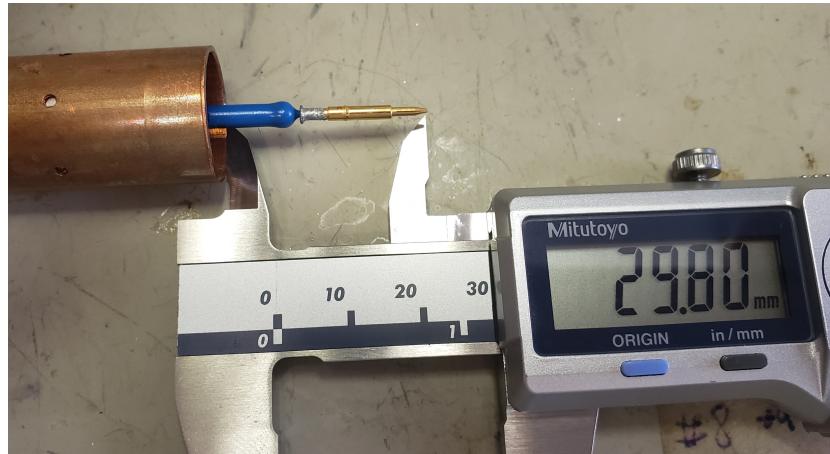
Nominal distance of pin from end of tube measured with calipers.
